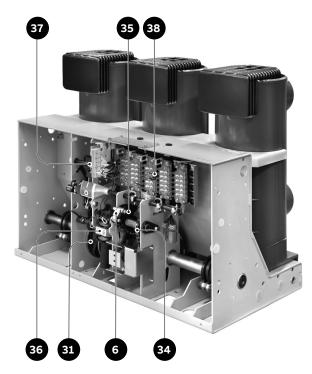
/5: View of the stored-energy spring mechanism and auxiliary equipment with the front plate removed
